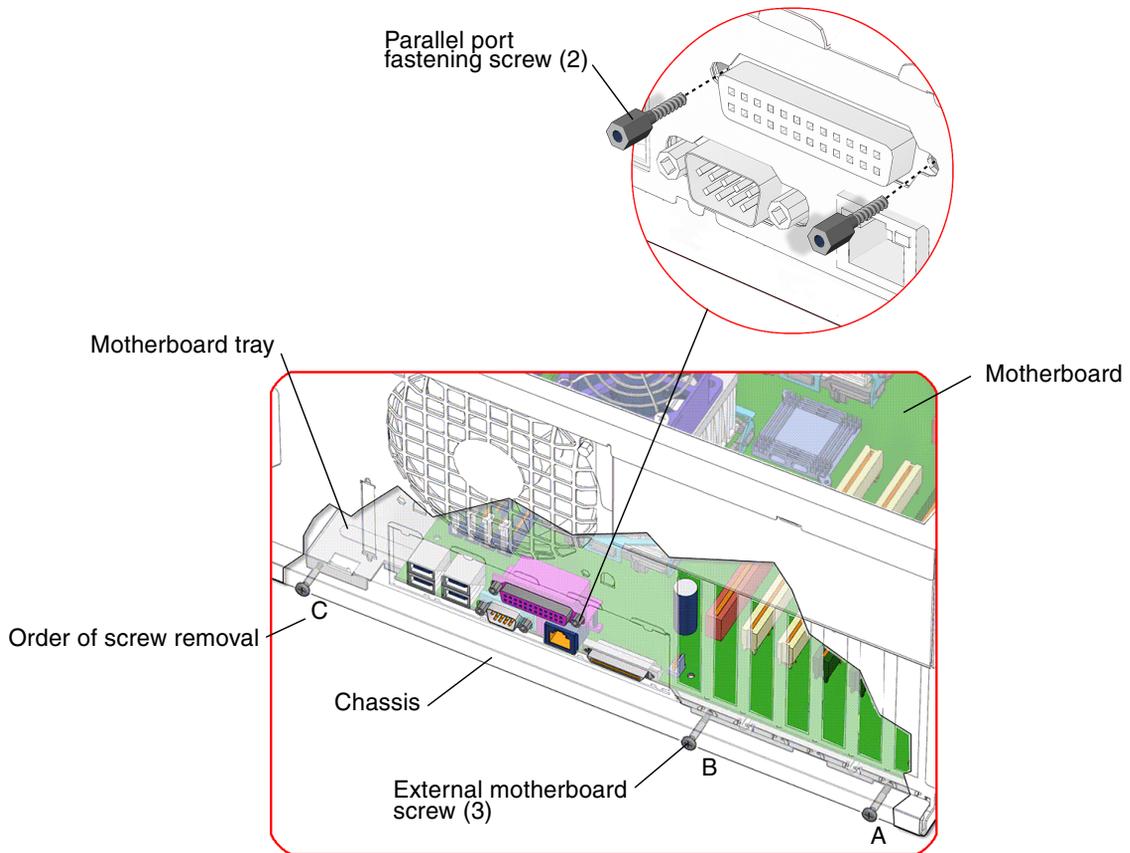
Removing the Parallel Port Fastening and External Motherboard Screws
